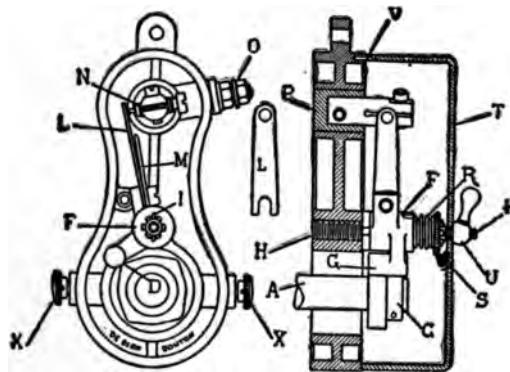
Sectional View of Contact Maker Fitted to Later Single and Four Cylinder De Dion Motors.
